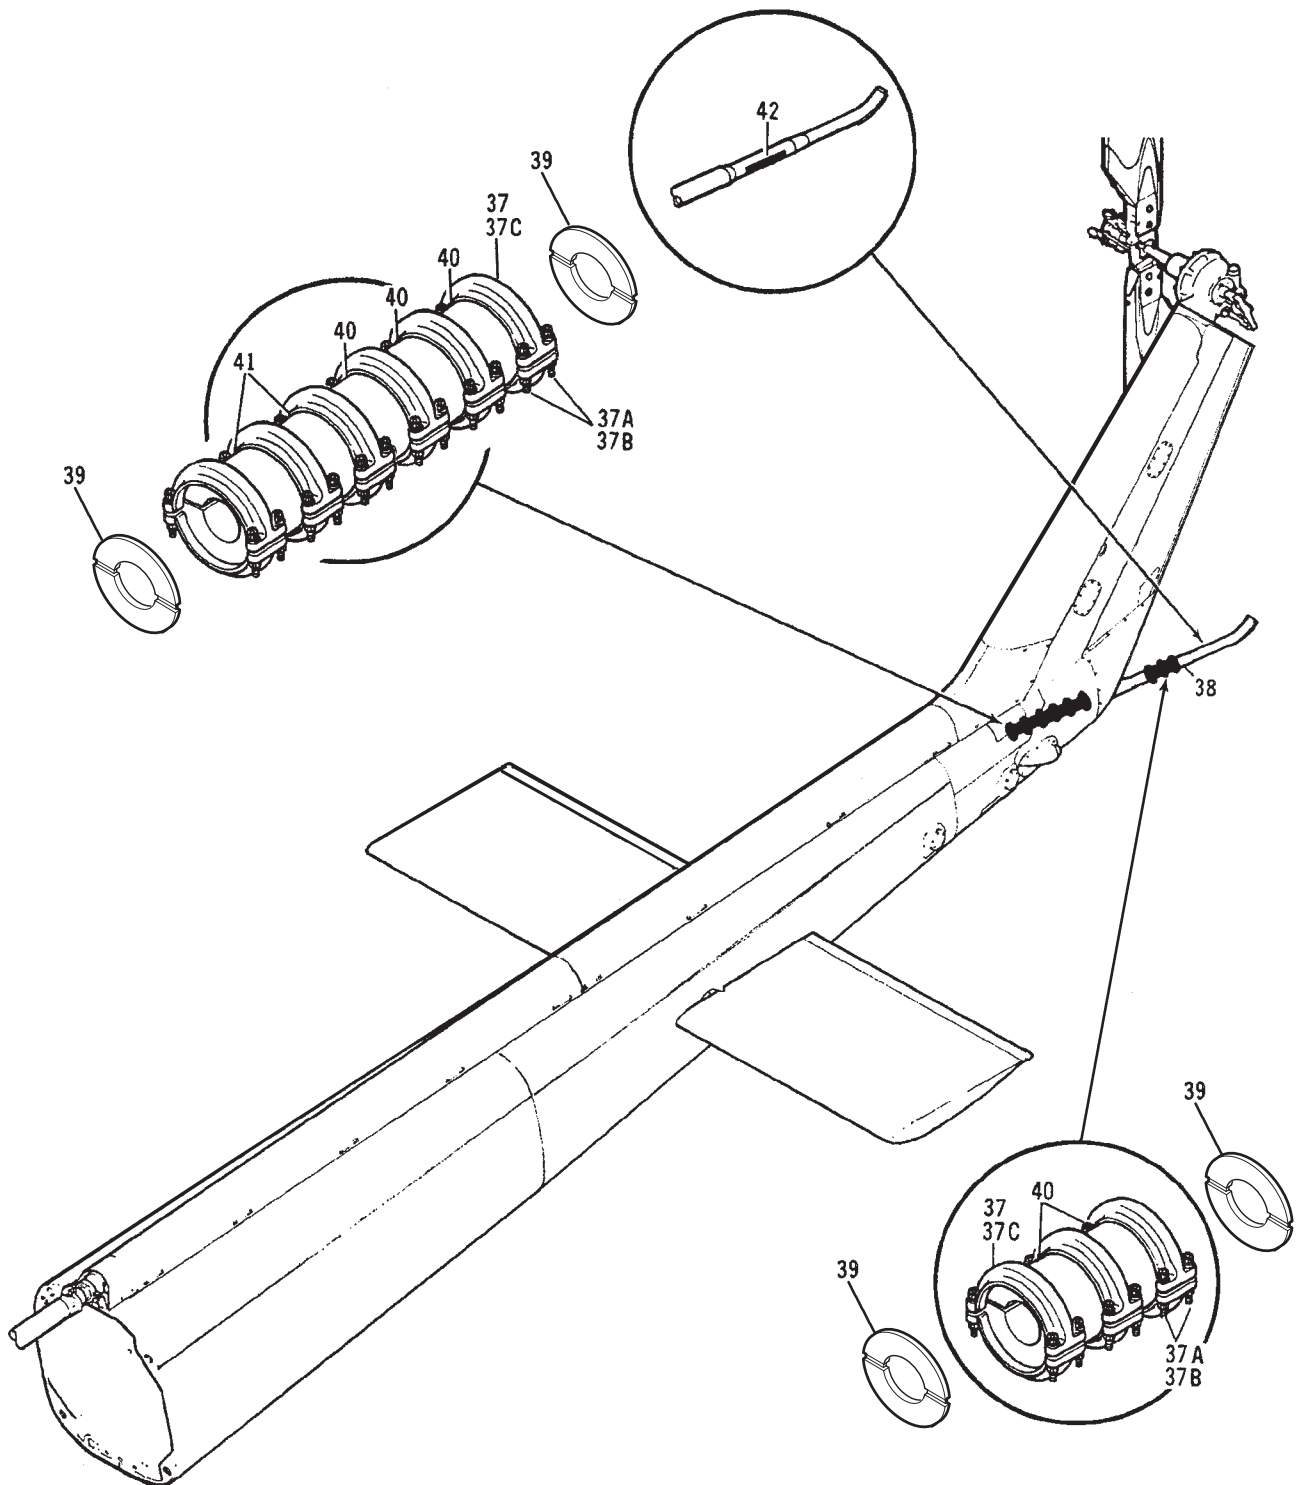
Ballast Installation (Sheet 2 of 2)
